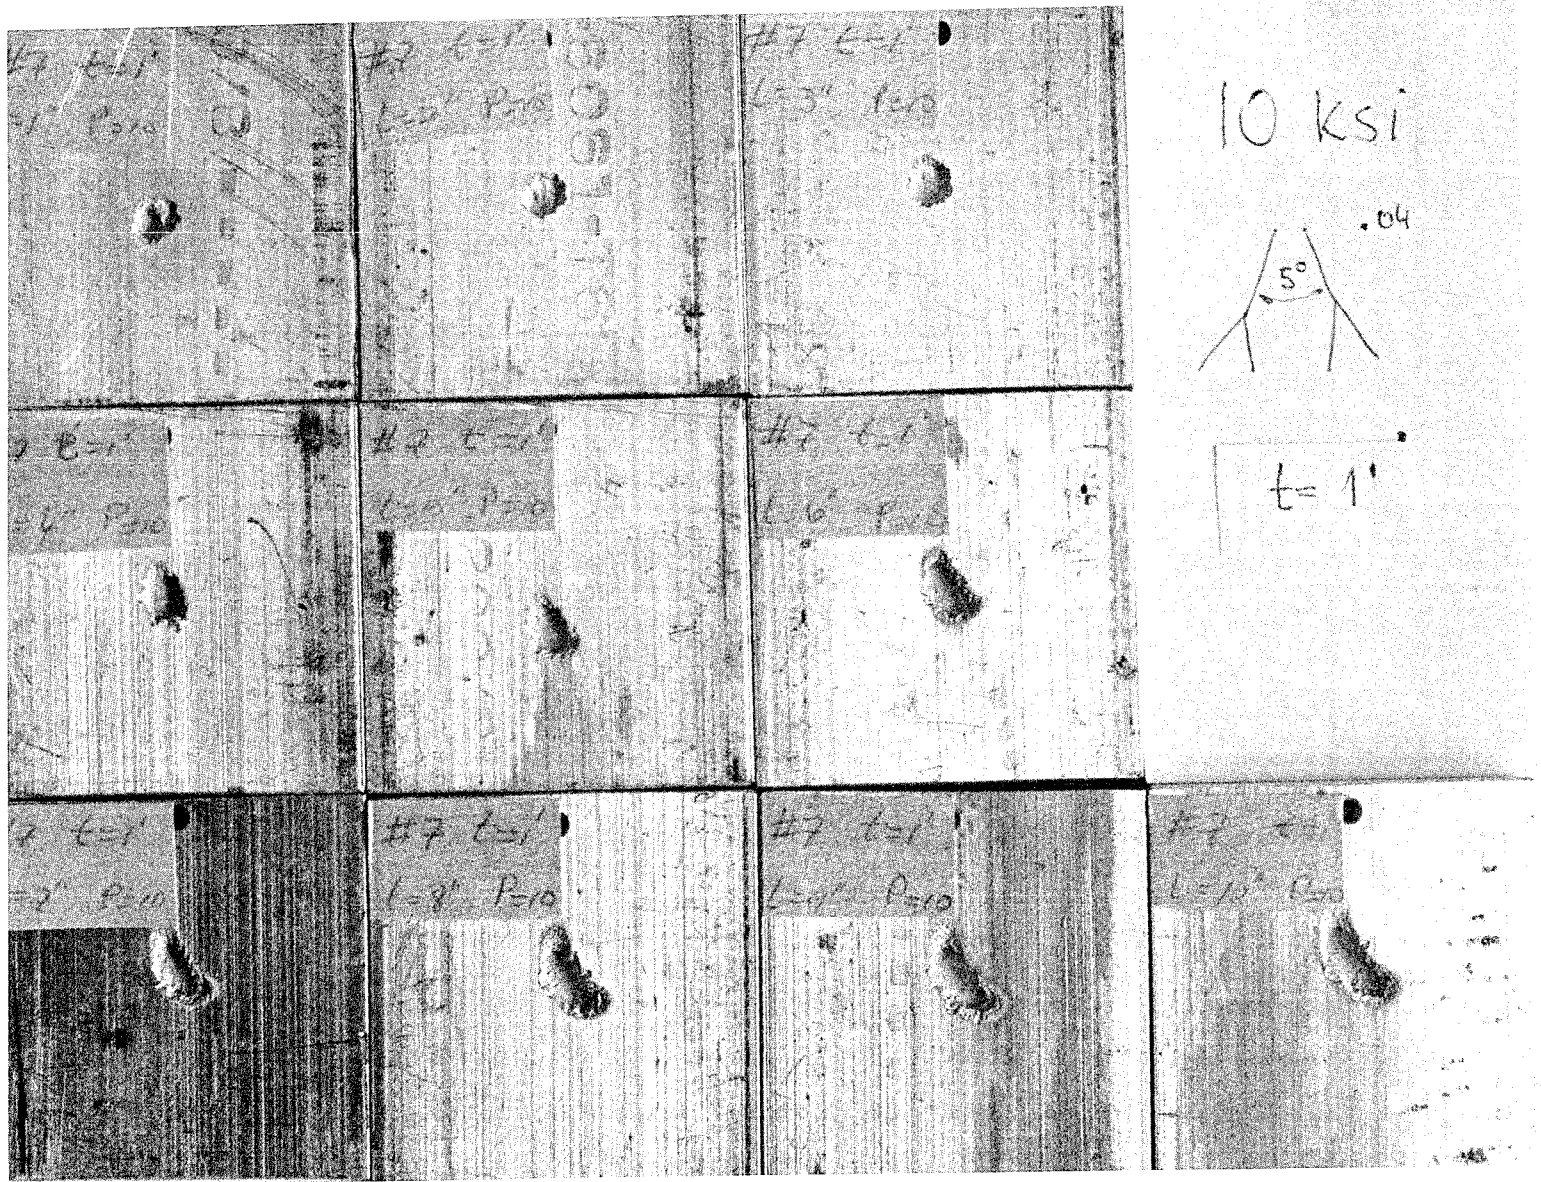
Erosion pattern in 2-in. aluminum target blocks, converging jets, included angle, 0.04-in. diameter, 10 ksi, 5 deg, one minute.
